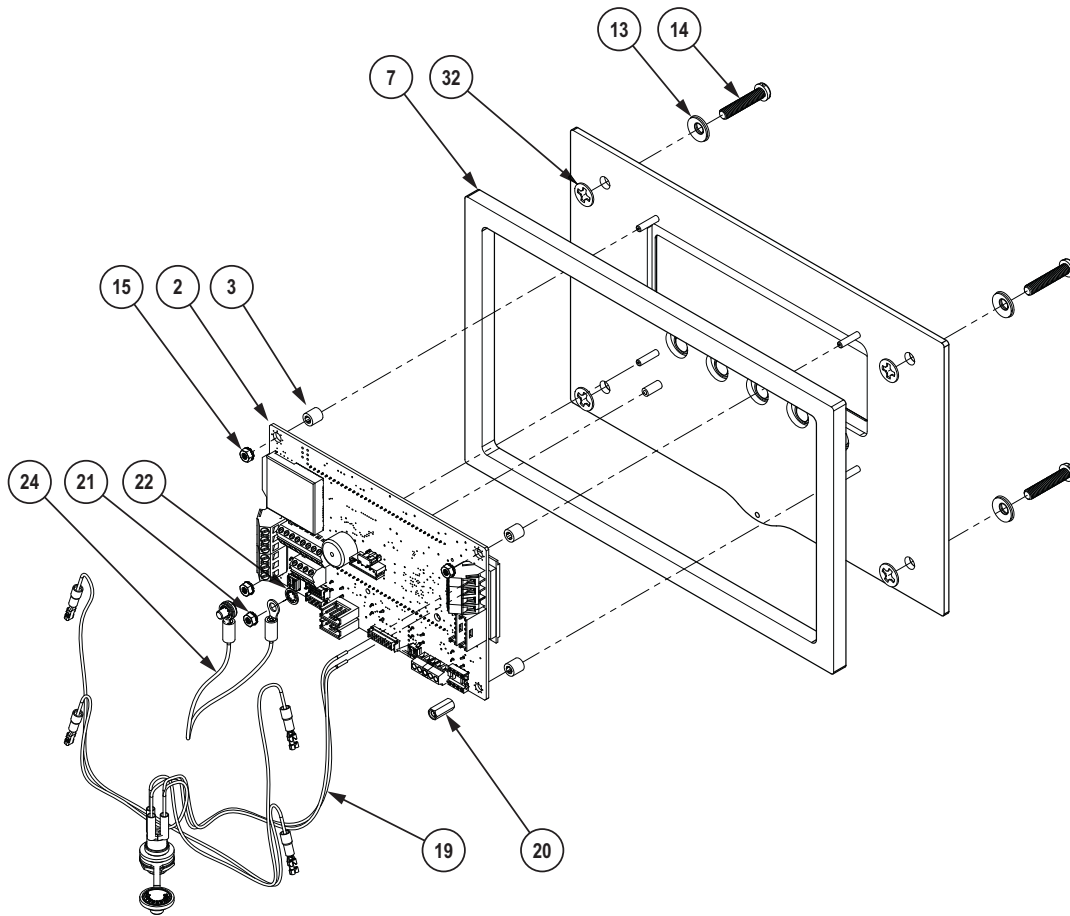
380 Replacement Parts Diagram, Rear View
